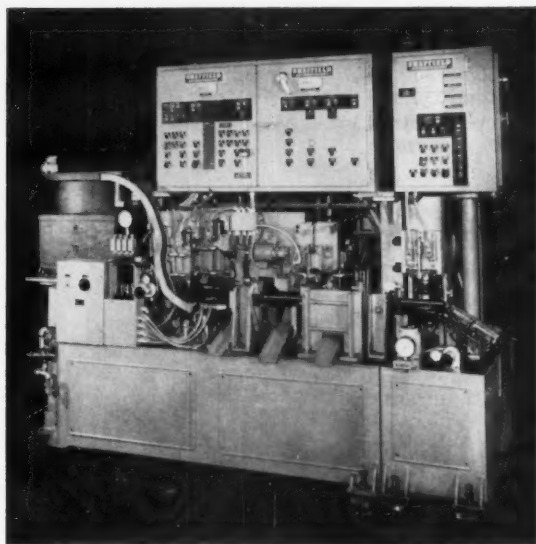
Sheffield automatic assembling and gaging machine for taper roller bearings
